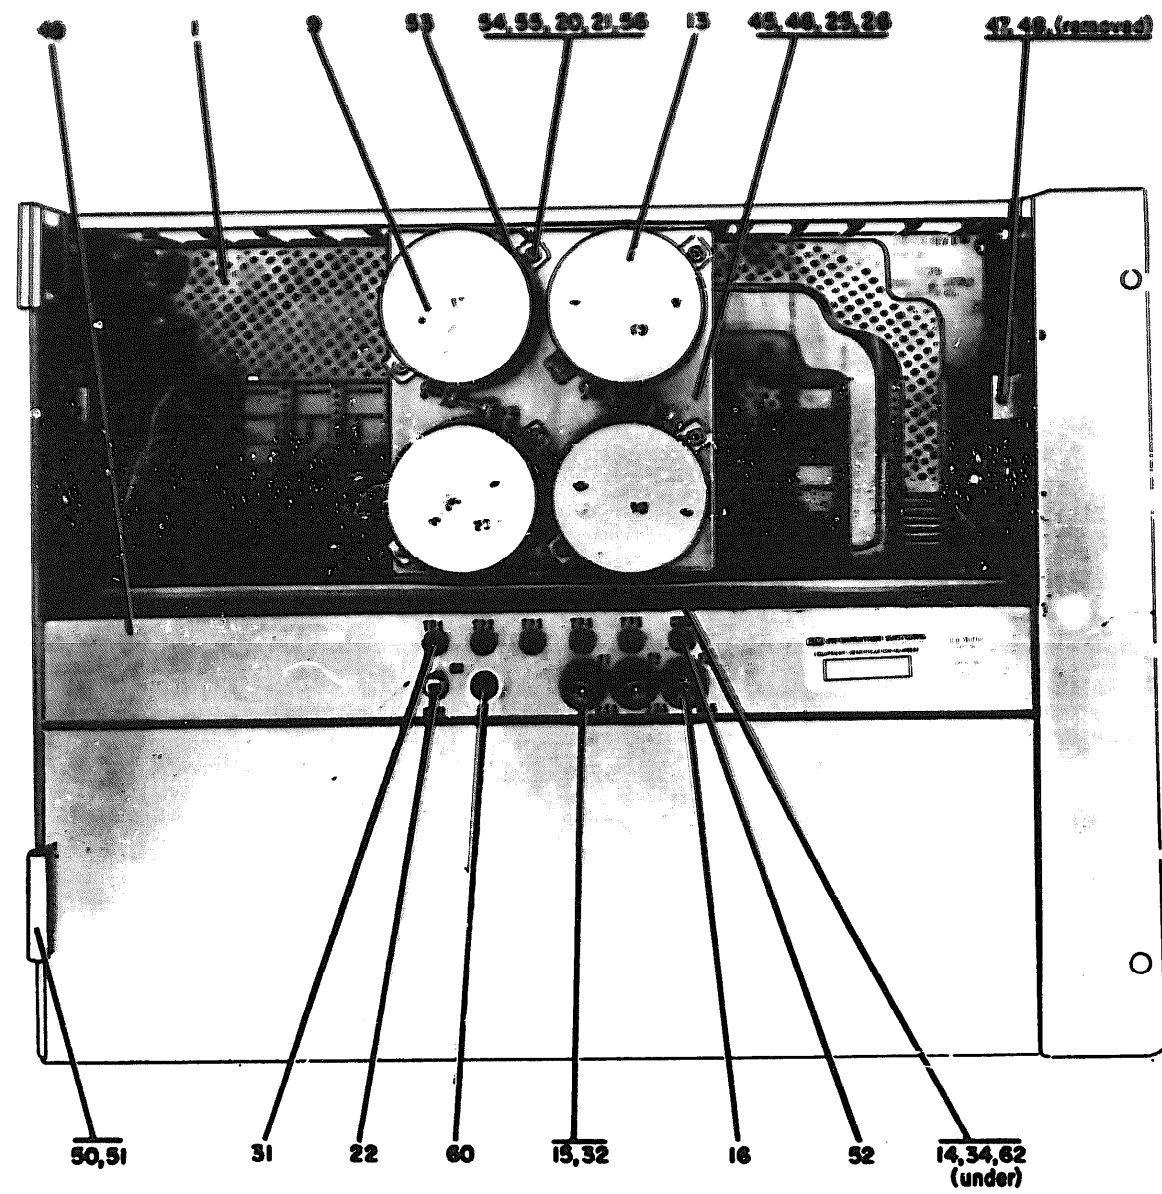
Circuit Card Assembly, Chassis (Sheet 1 of 4)
